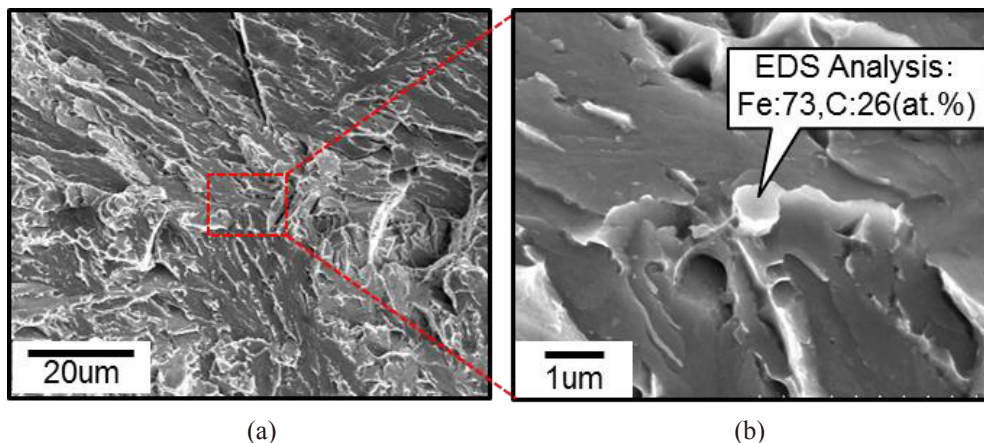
Fracture surface of CTOD test(-196°C), (a)near fracture initiation point, (b)close up of (a).
